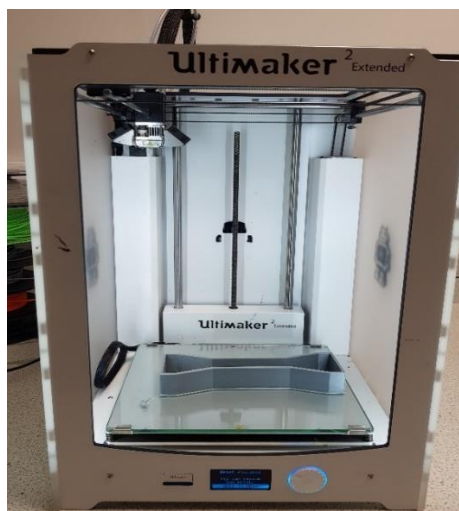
Design and printing of the dog-bone shape moulds using Ultimaker 2+ plus 3d for direct tension tests.
